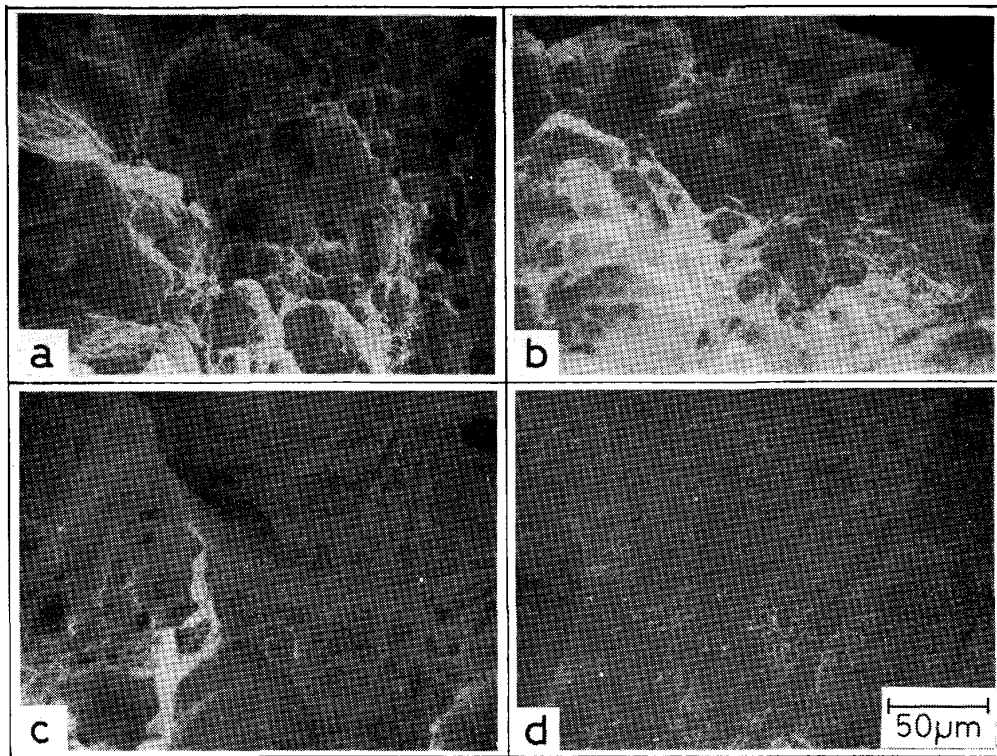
SEM microfractograph of steel B fractured in Charpy impact test at RT; bottom of notch in QT (a) and QLT (b), center of fracture surface in QT (c) and QLT (d).
